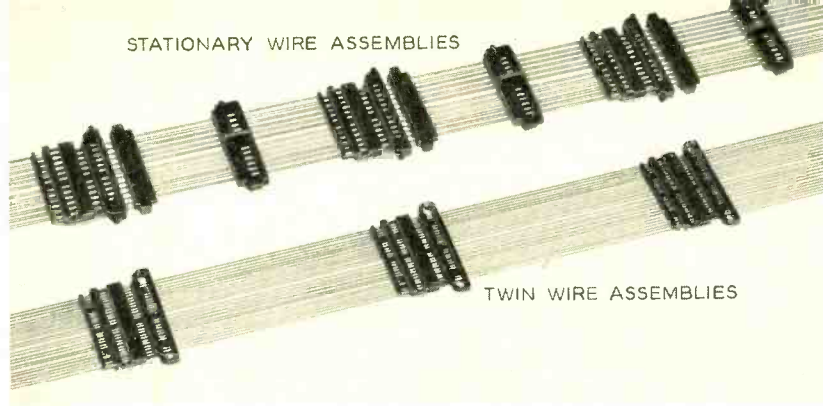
Molded stationary and twin wire assemblies before cutting to the proper length.
